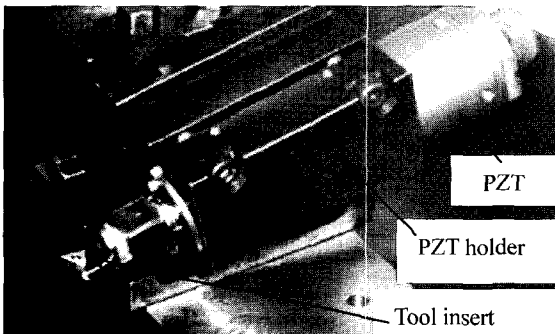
Photograph of tool holder, including PZT, used for UVC
